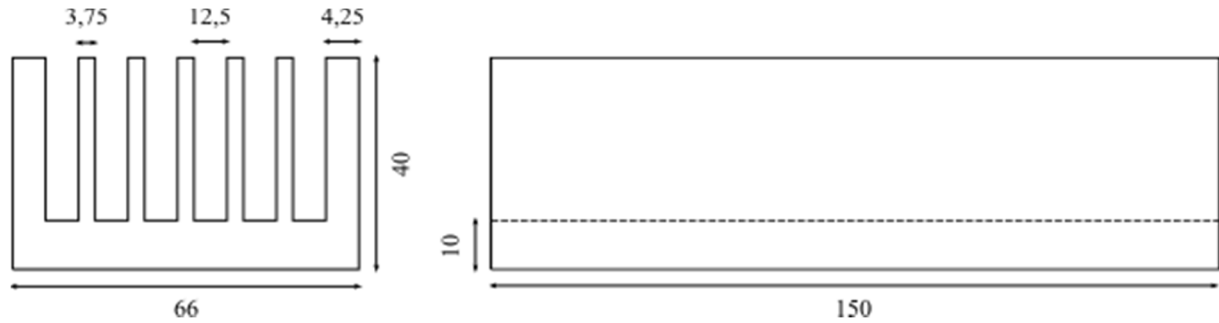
Front (left) and side (right) view of the heat sink geometry including dimensions in mm
